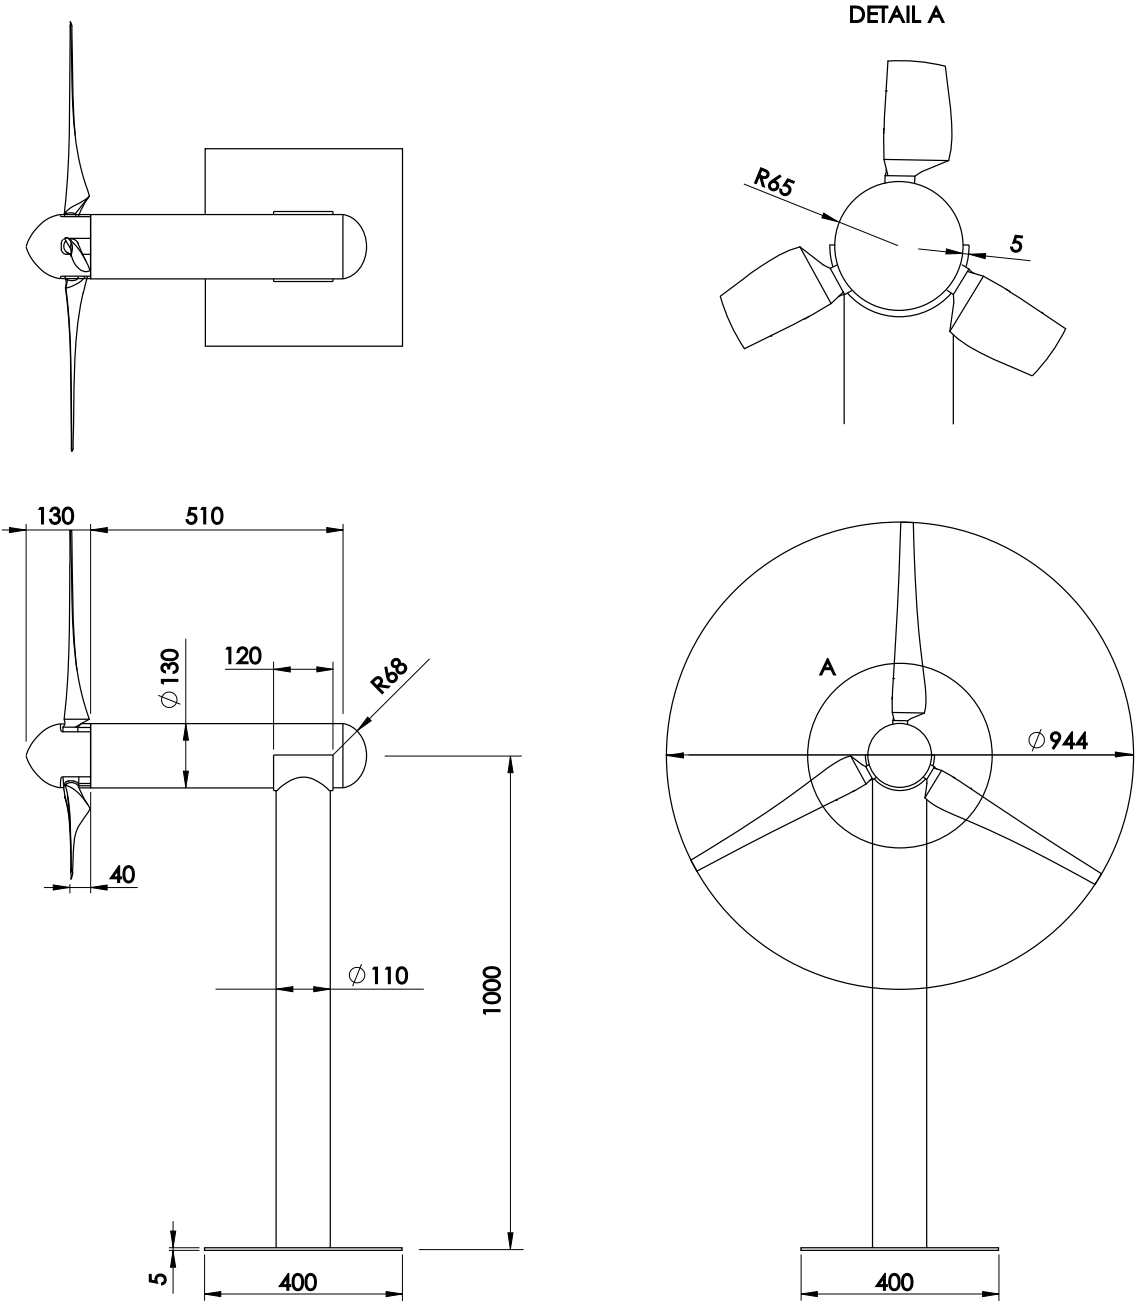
Technical drawing of NTNU model wind turbine T1.
